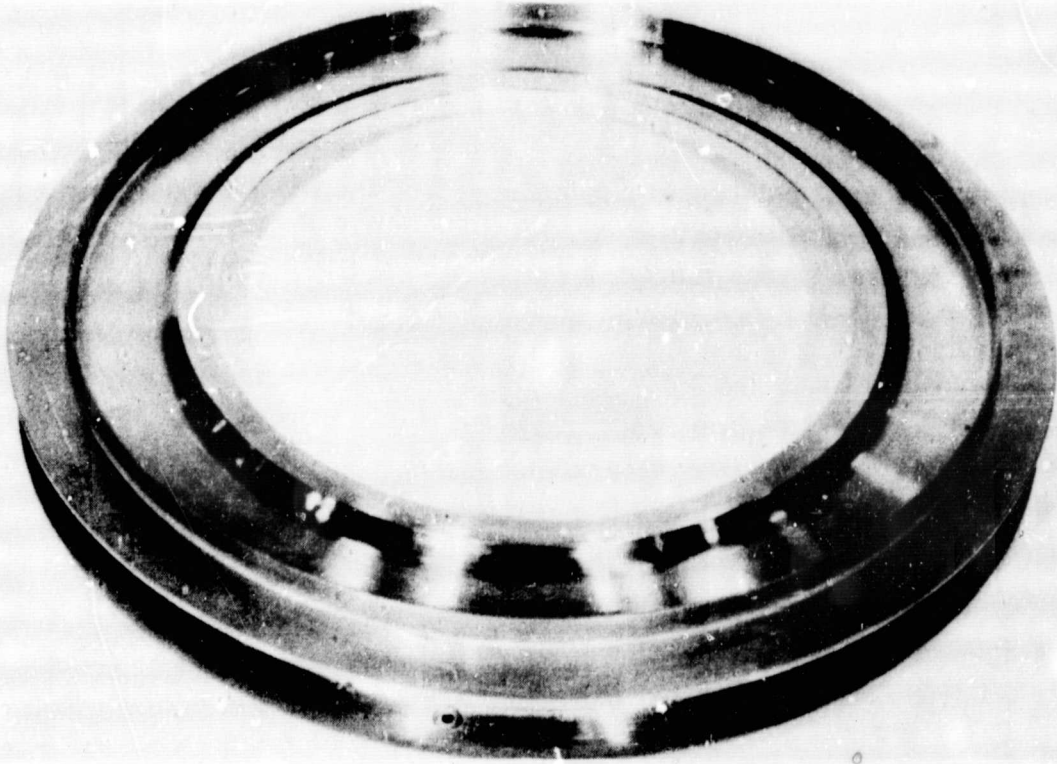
Test Rig End Seal Disk with Seal Face Up (XP-83362)
